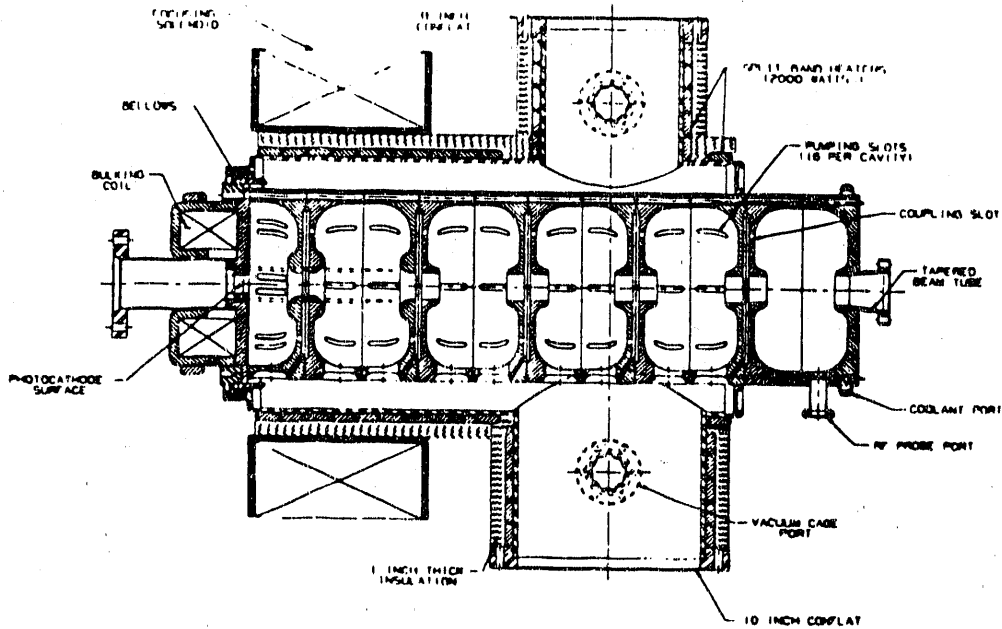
A cutaway drawing of an on-axis-coupled linac structure.
